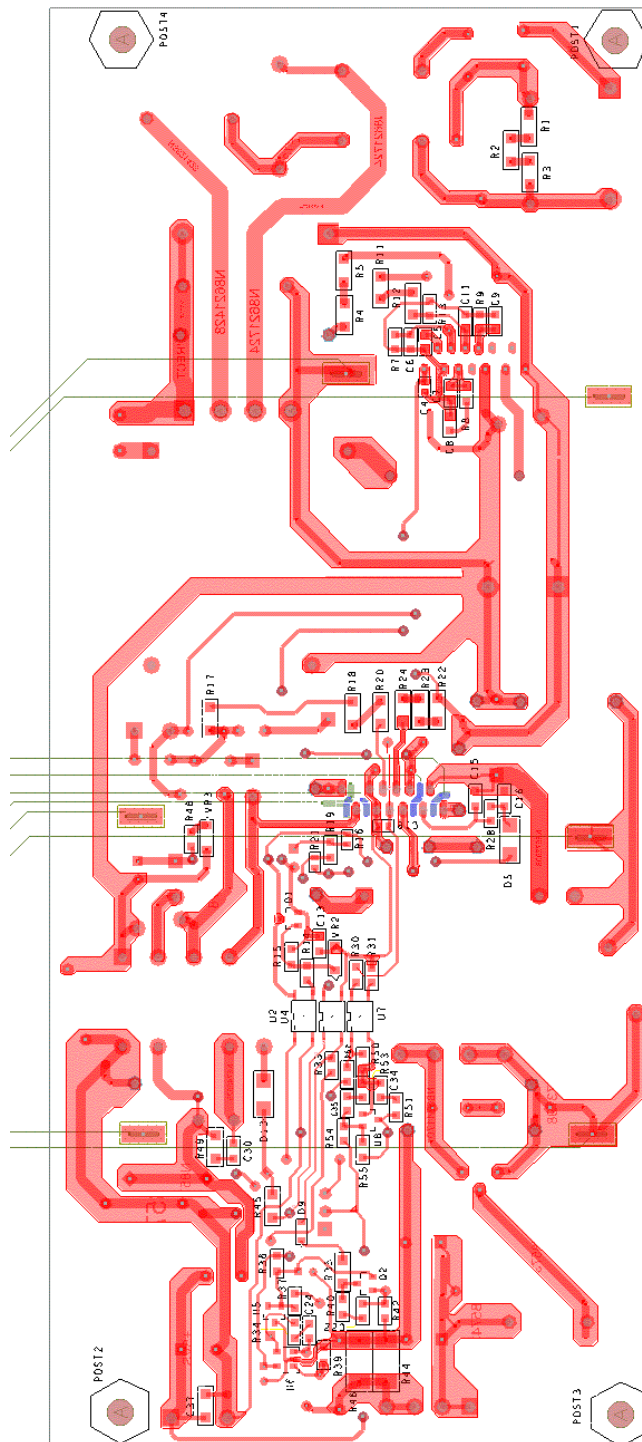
Printed Circuit Layout, Bottom Side Traces and Components.
